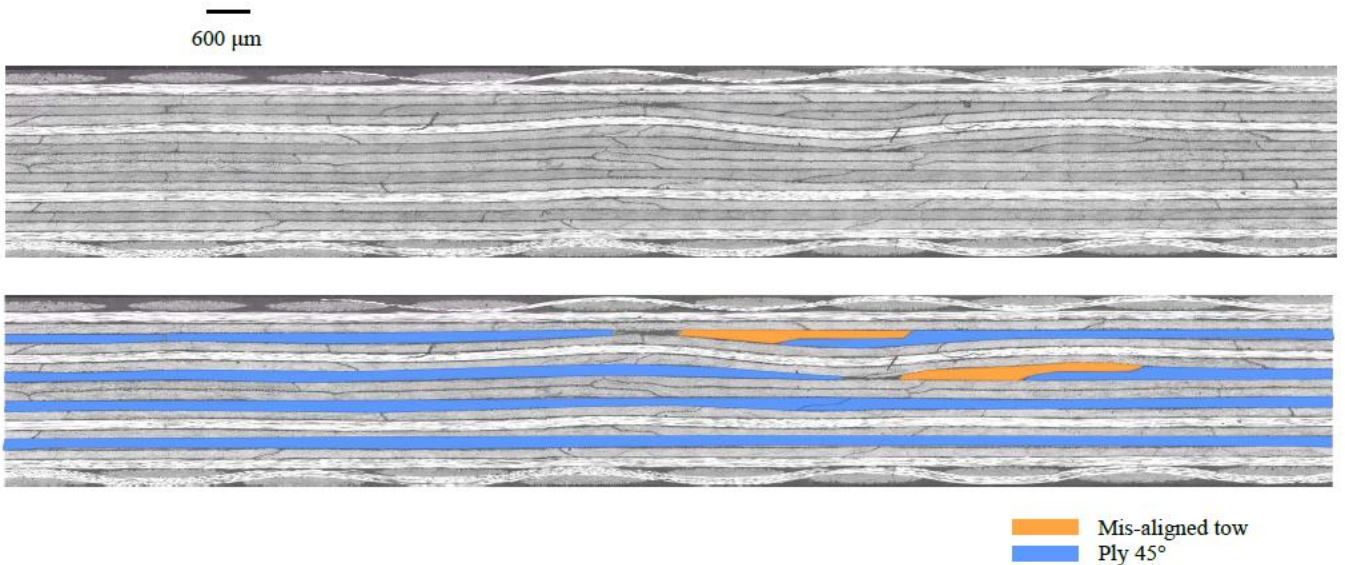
Side cross section of 45G7.1 with marked defects, indicating that 5 defects out of 7 have probably healed at this location
